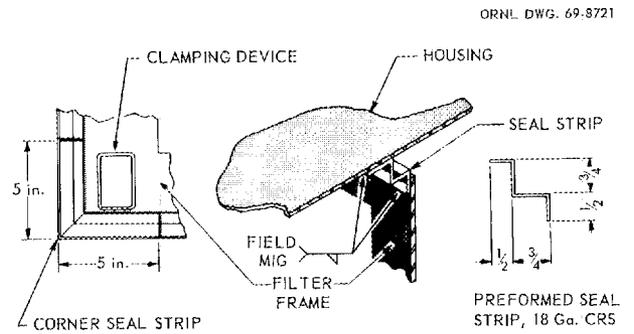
Mounting frame made for a single plate. Details and installation of Z strips to seal frame into housing.
